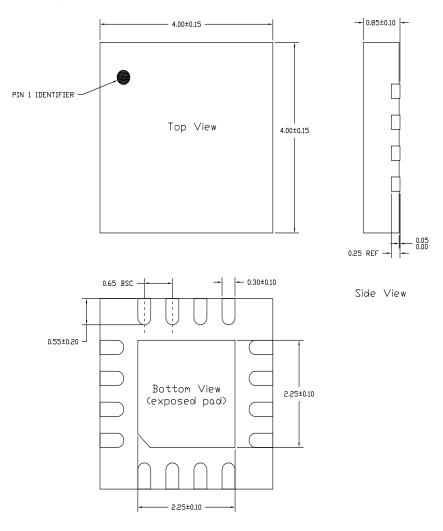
QA Package Dimensions and Pinout (all dimensions are in millimeters)
